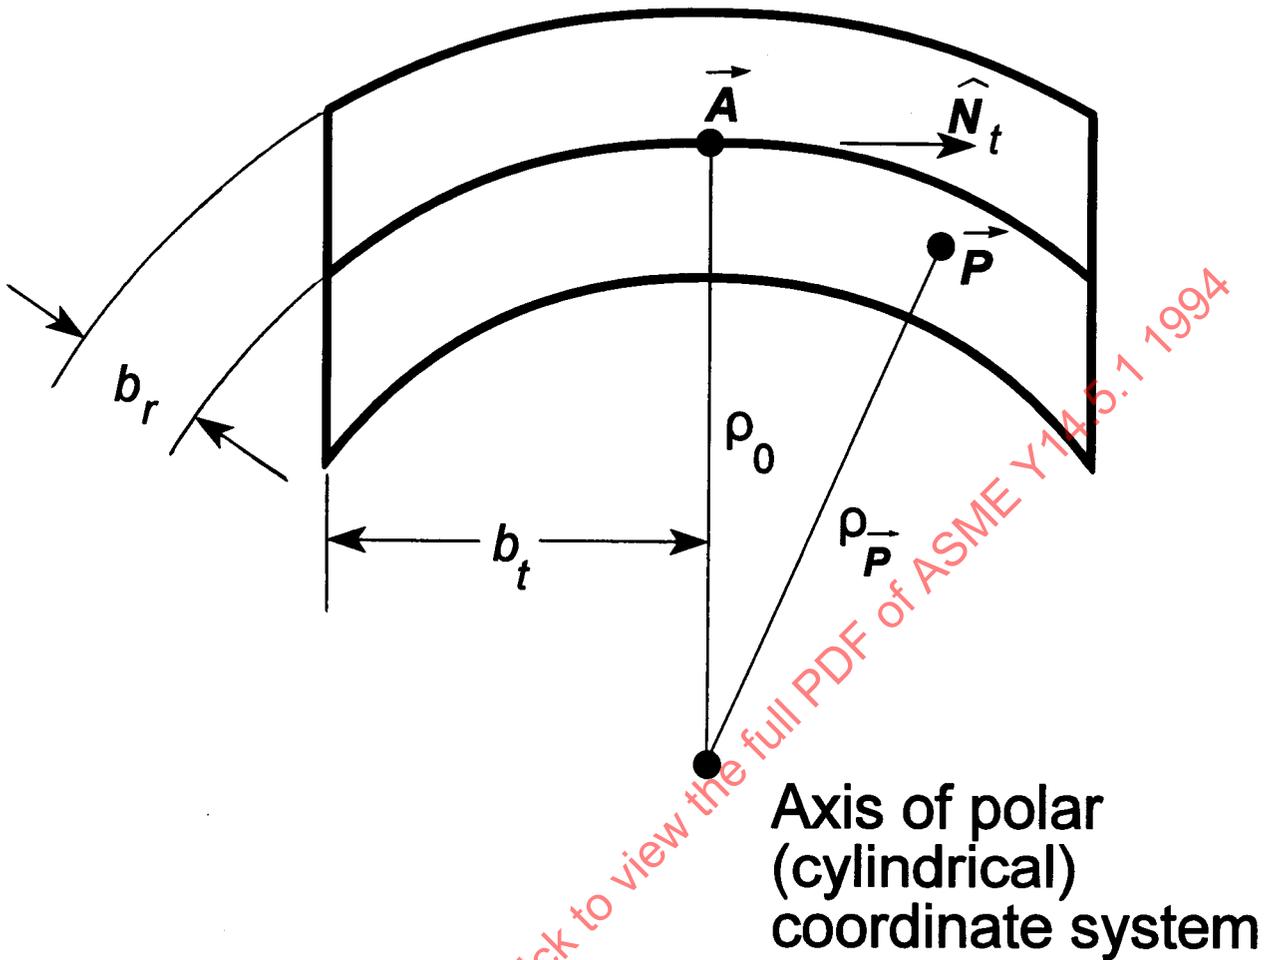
DEFINITION OF THE TOLERANCE ZONE FOR POLAR BIDIRECTIONAL TOLERANCING
